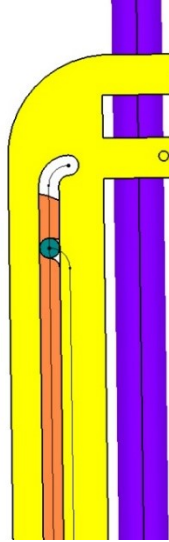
The farthest forward position of the outer slide rod in the locking mechanism.
